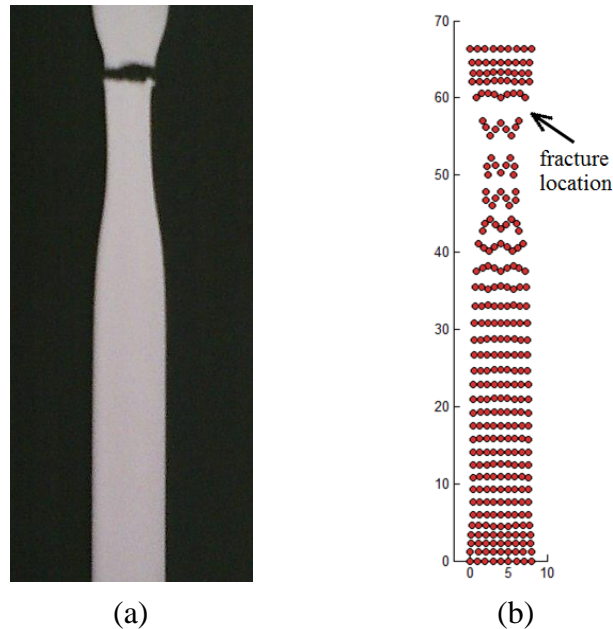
(a) The shape of fractured experimental specimen due to creep test. (b) Numerical specimen shape after creep test completed.
